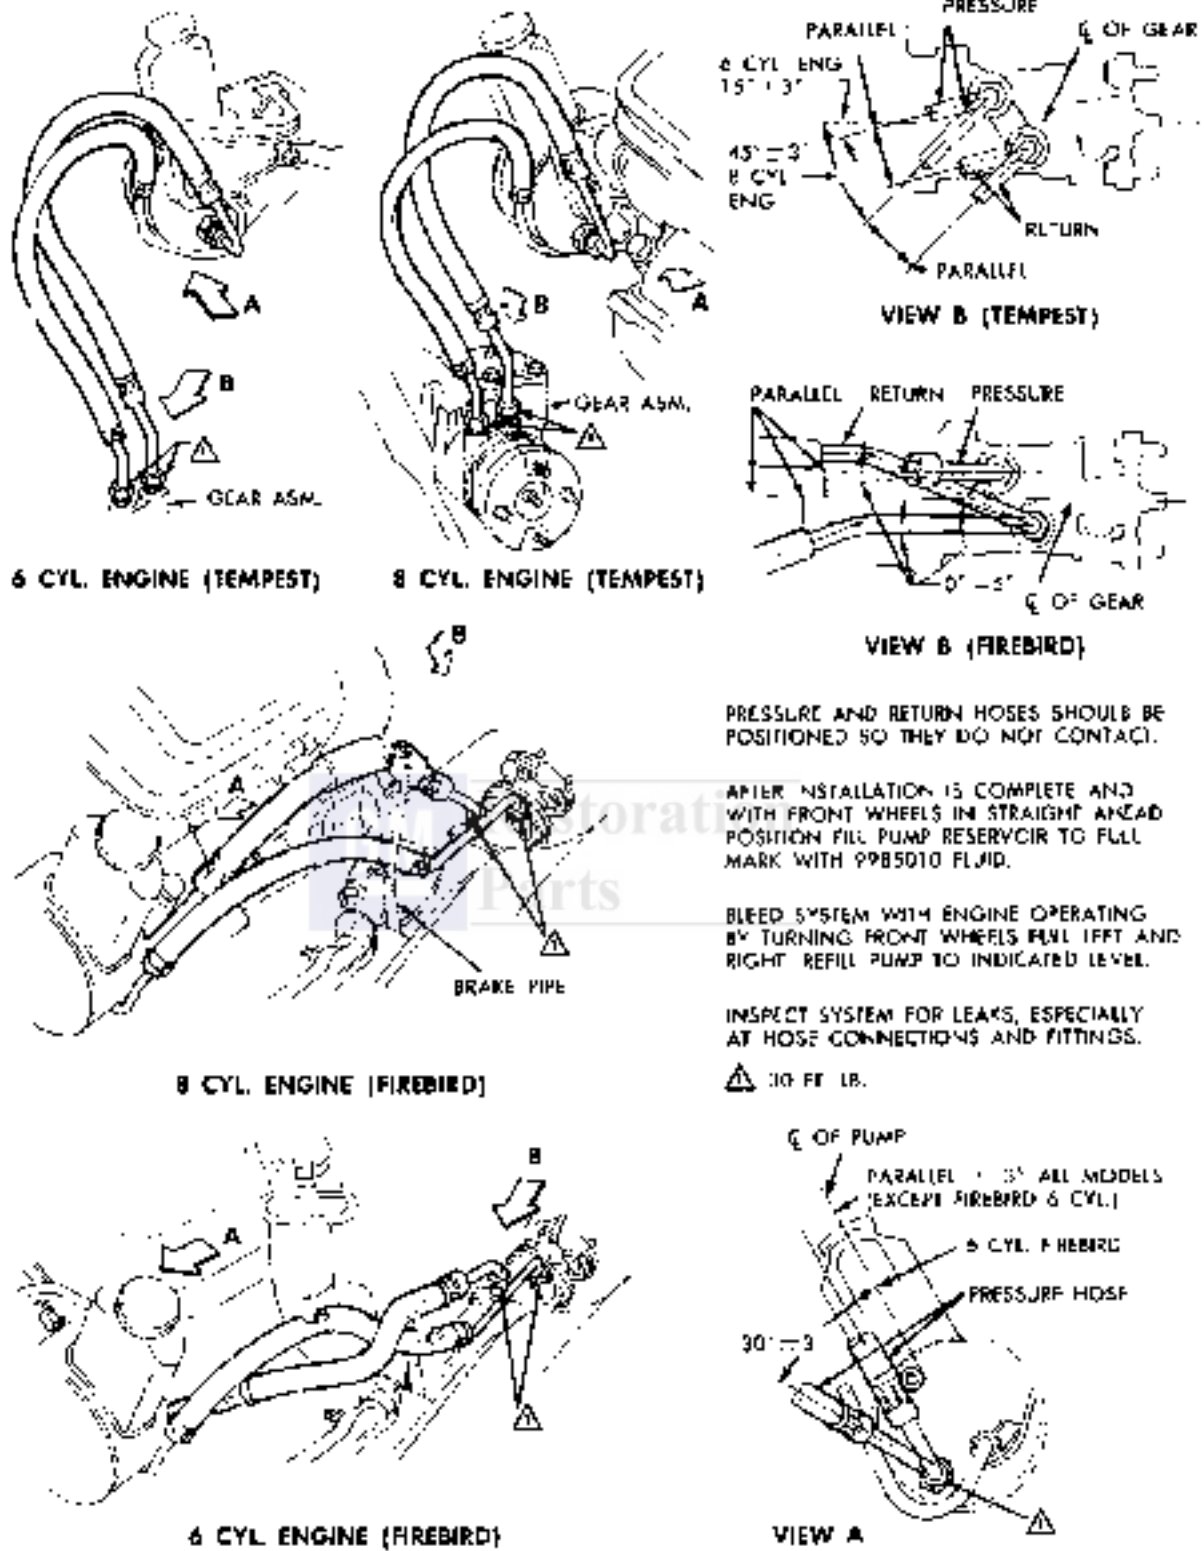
Tempest and Firebird Installation of Power Steering Gear Assembly
